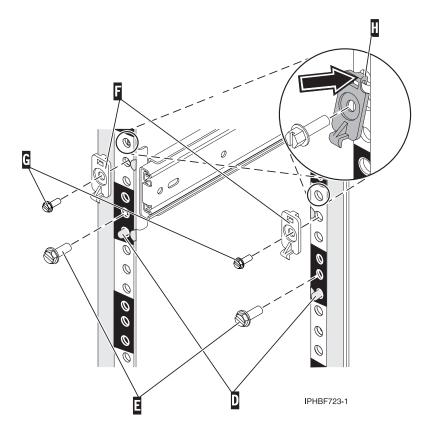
Front slide rail alignment pin, retaining screws, and latch bracket.
